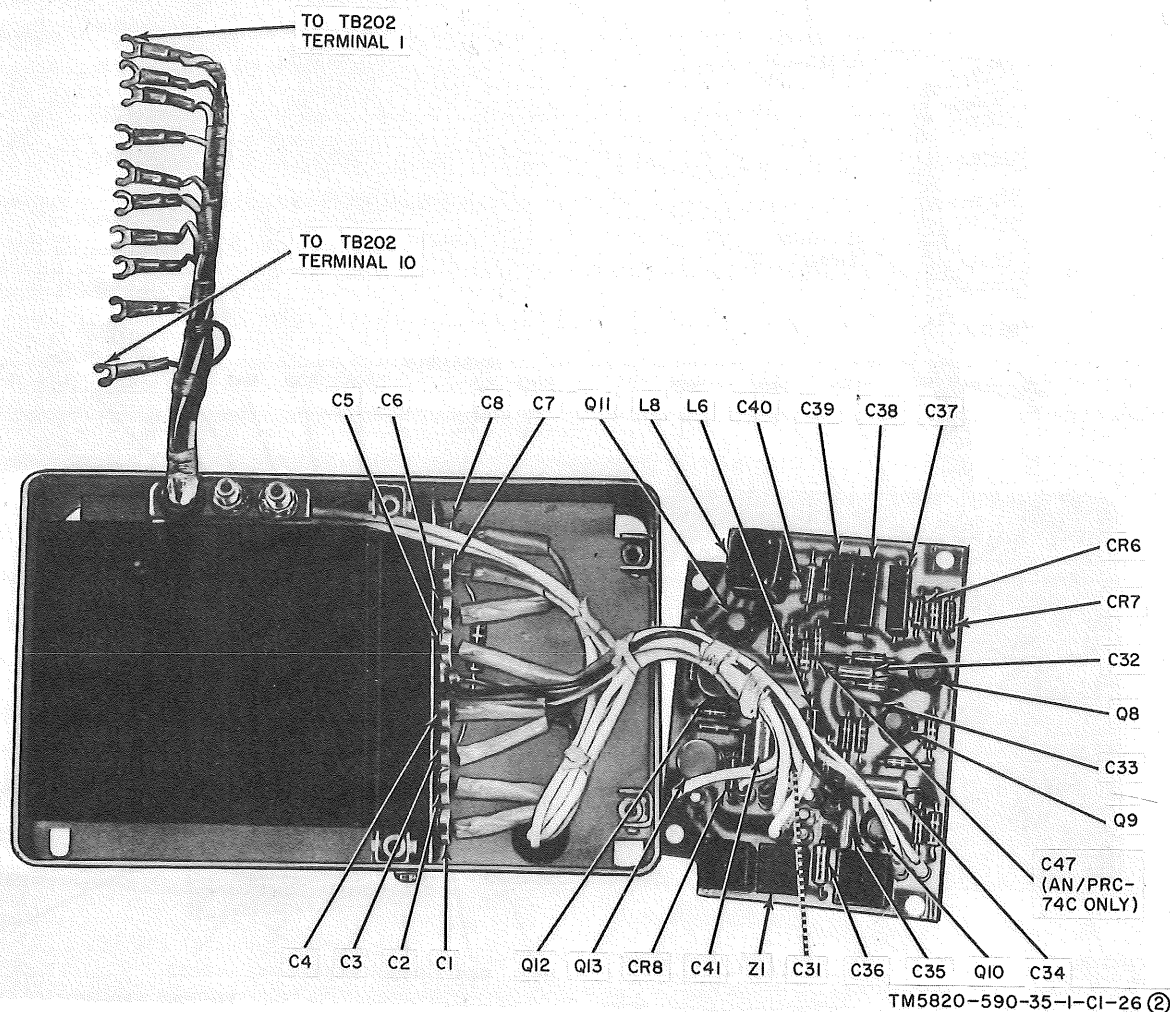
(2). IF audio module front view, component boards removed (part 2 of 2).
